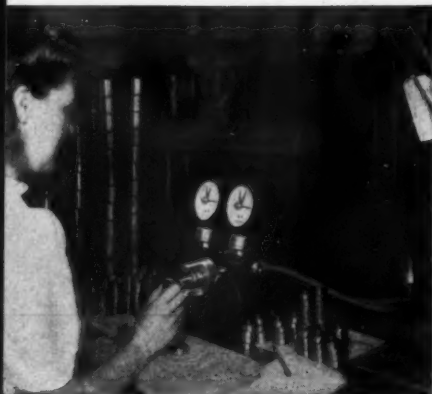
Final inspection of ball bearings, using a duplex air gage. The operator is measuring both I.D. and O.D. for size, taper, and out-of-round.
